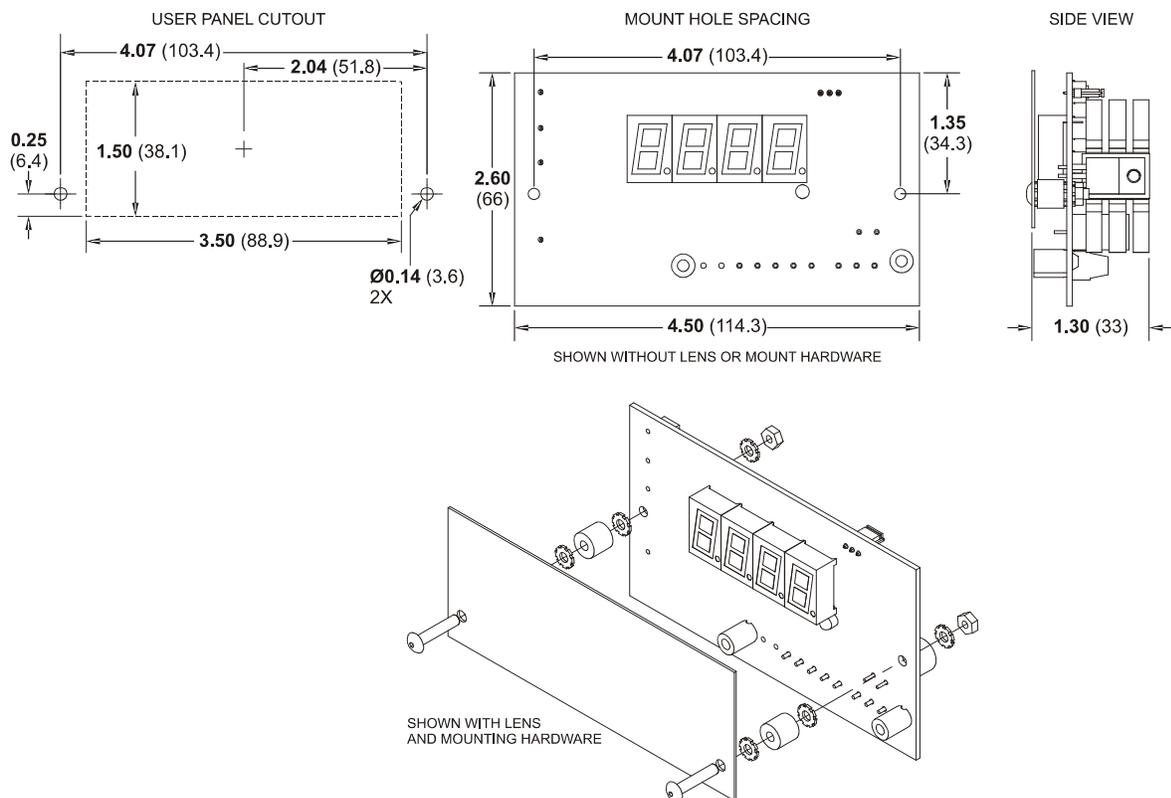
DIGITAL METER DIMENSIONS AND PANEL CUTOUT DIMENSIONS
